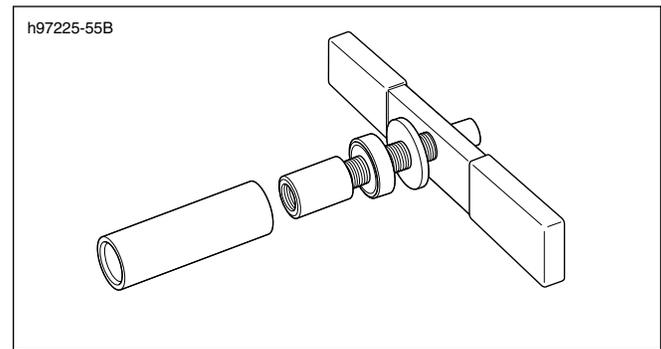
Sprocket Shaft Timken Bearing Cone Installer (Part No. HD-97225-55B)
